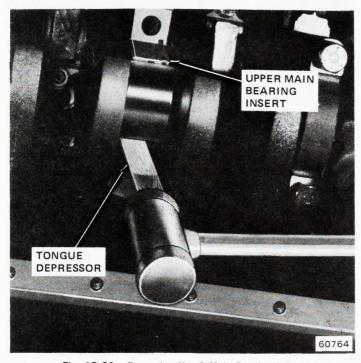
B-60 Removing No. 3 Main Bearing Insert
